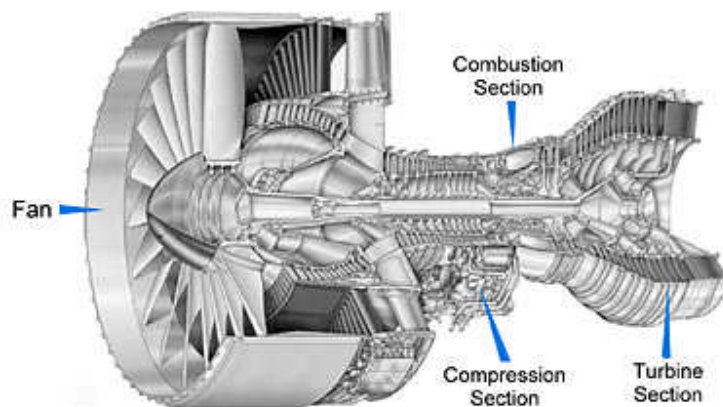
Cutaway Drawing of a Commercial Turbofan Engine⁽⁴⁾
